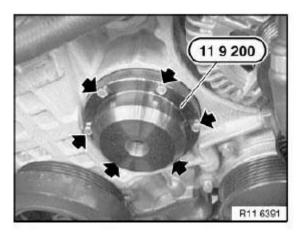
Identifying Special Tool 11 9 200 Onto Sealing Cover Courtesy of BMW OF NORTH AMERICA, INC.
